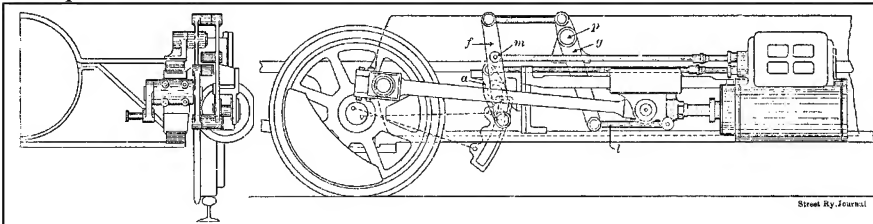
Diagram of Engine Cylinder, Showing Valve Gear.
